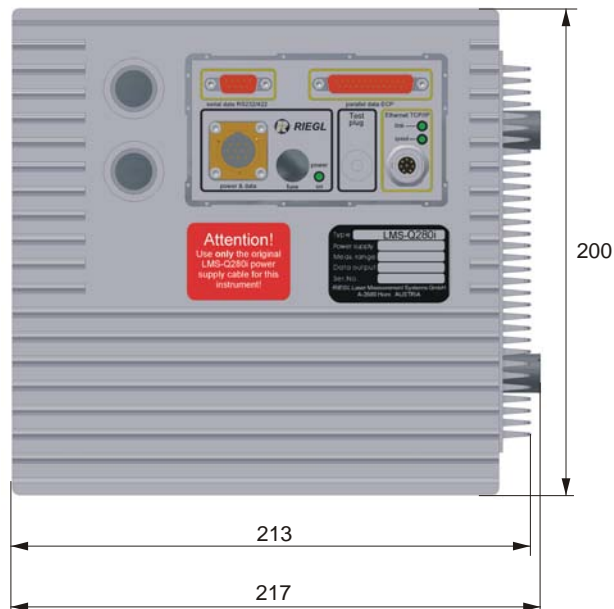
Rear view of LMS-Q280i (rear plate side)
